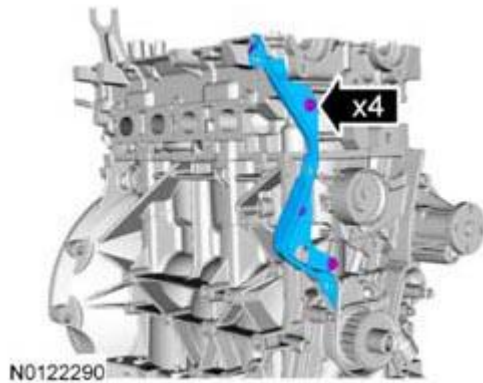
Locating Timing Belt Cover Backplate And Bolts
